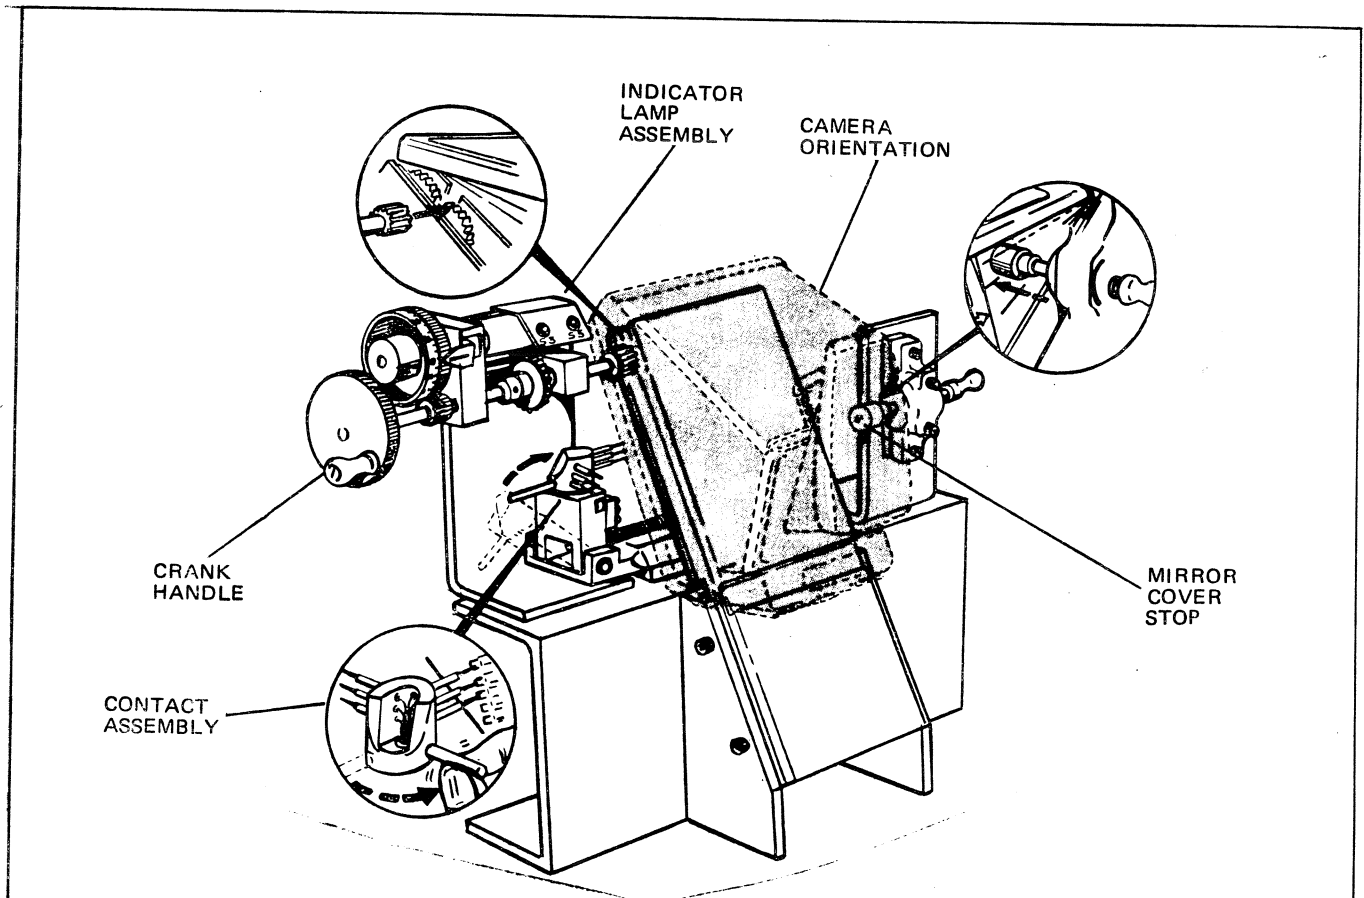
TEST FIXTURE (S3, S5 SWITCHES)
